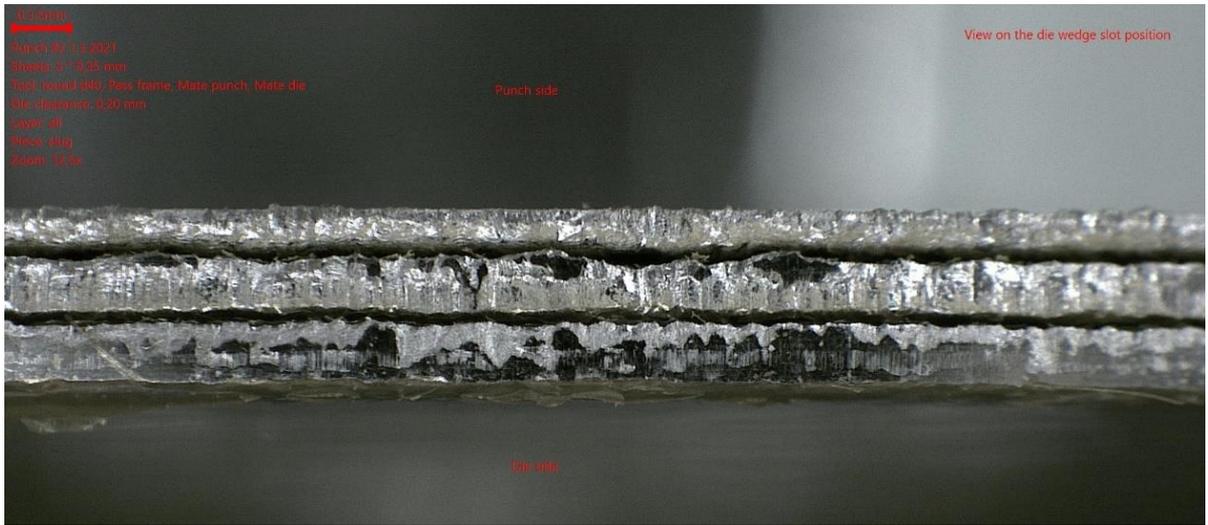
Stack of three M270-35A sheets, die clearance of 0.20 mm. Material transfer has decreased. Overall appearance is clean. Top layer looks fine. Coating is flaking badly due to increased rollover depth in the bottom layer. Burr size felt same as the stack in Figure 25.
